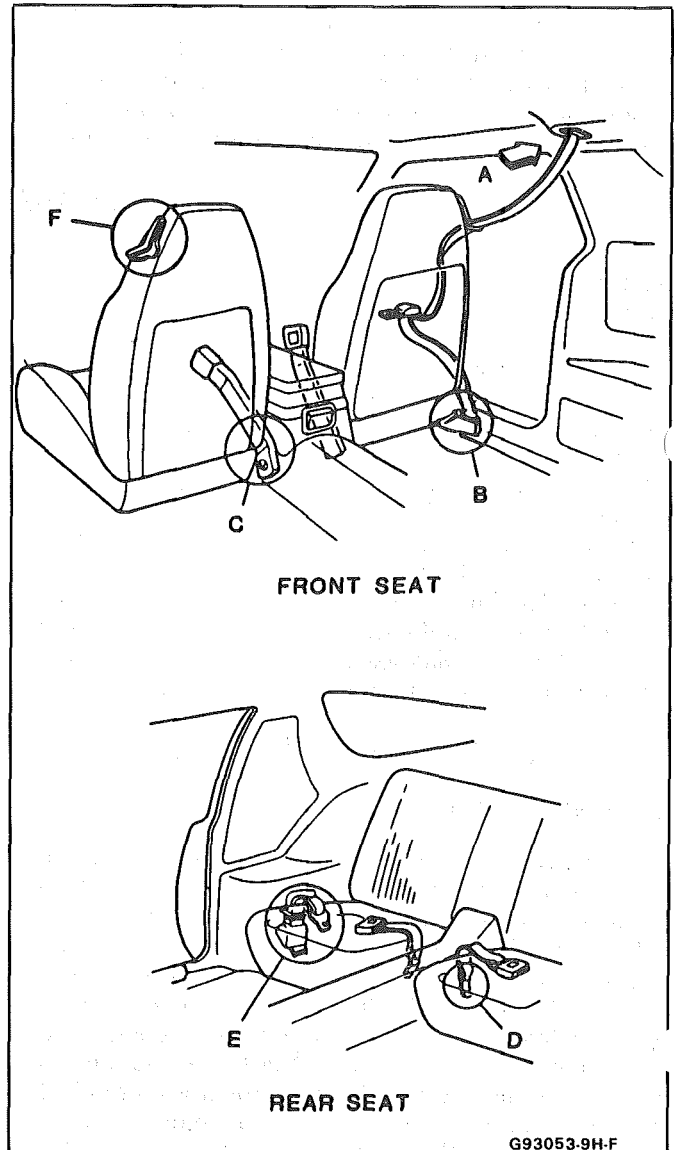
Front and Rear Shoulder and Lap Belt Installation
